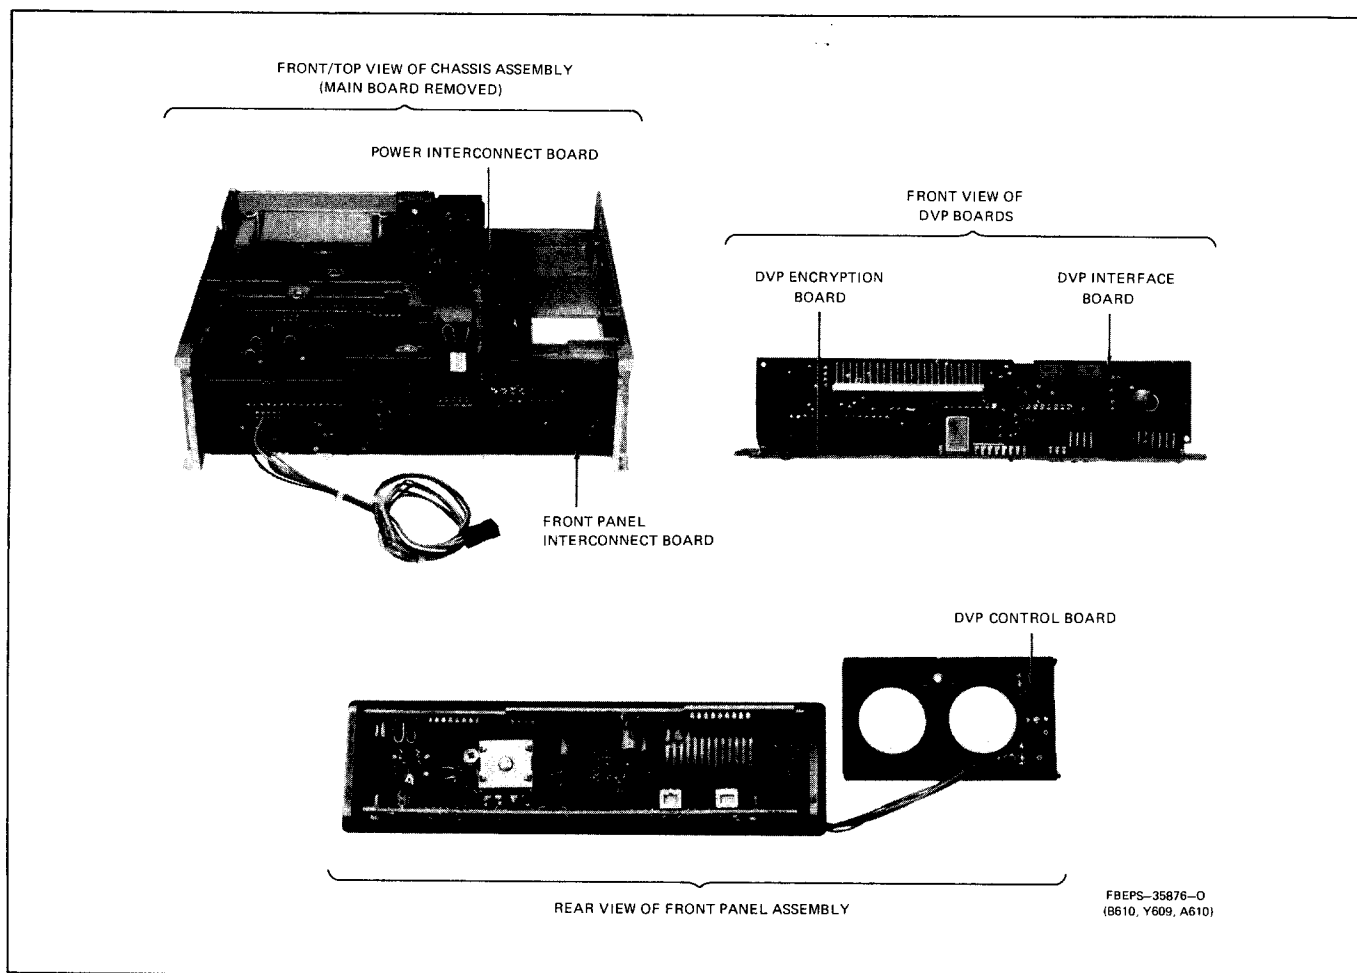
Chassis, DVP Circuitry, and Front Panel Assemblies
